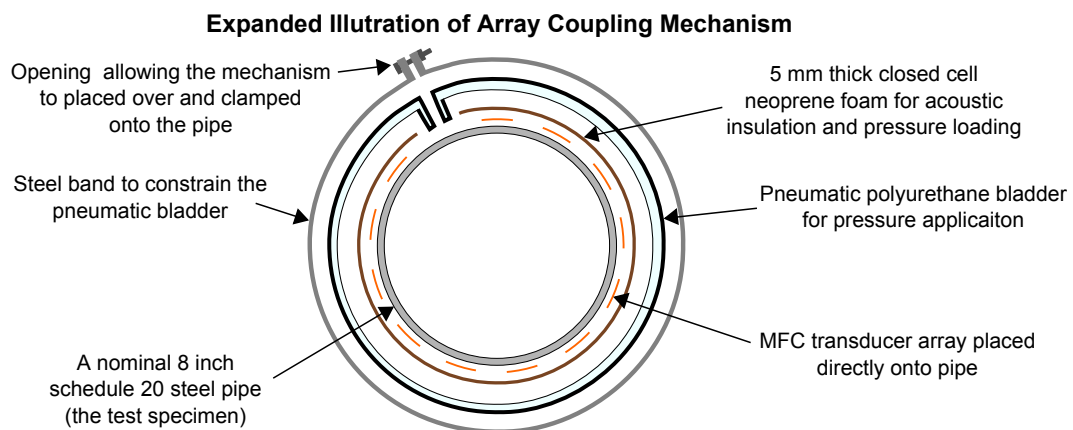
An illustration showing an expanded view of the pneumatic bladder method for dry force coupling an MFC array around a pipe.
